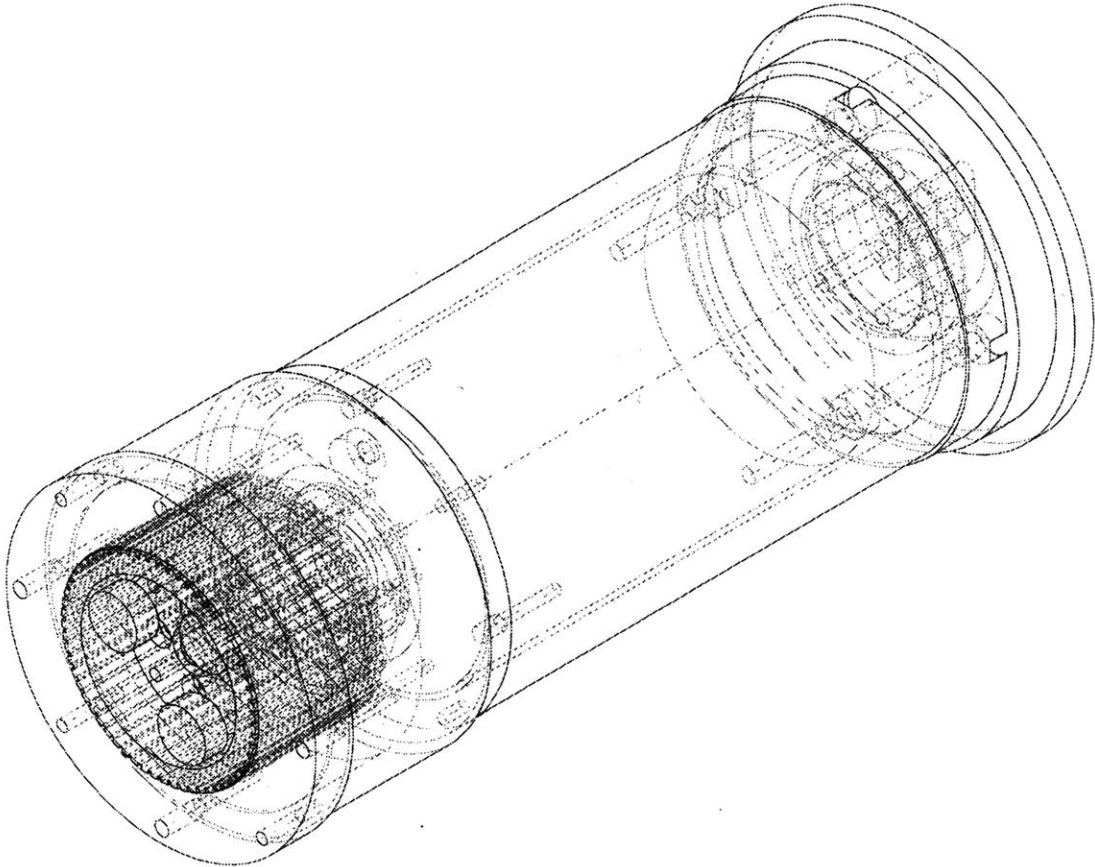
Flexural Wave Actuator Prototype CAD (Toothed Flexible Tube Shown)
